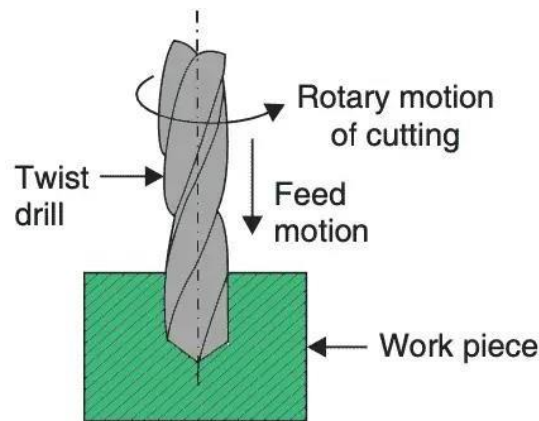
Drilling works (<https://extrudesign.com/how-drilling-machine-works-different-types/>)
